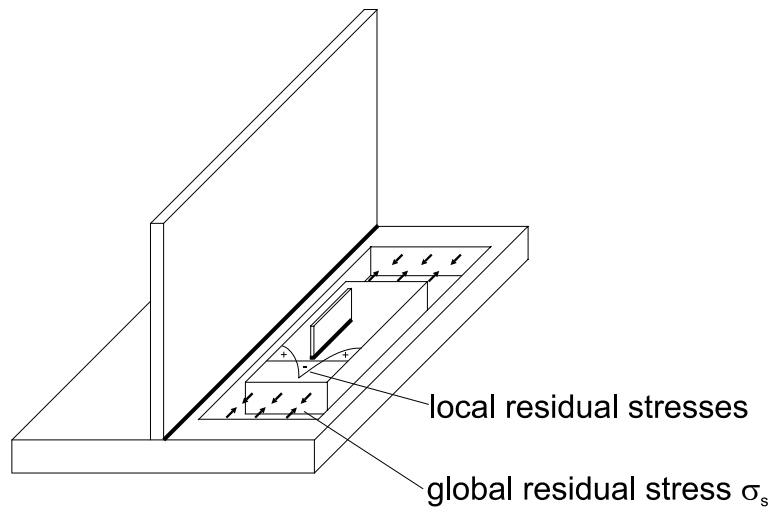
Local and global residual stresses for a fracture mechanics model with weld attachment
